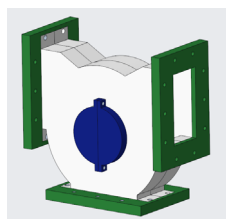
3D CAD drawing of the waveguide circulator assembly.
